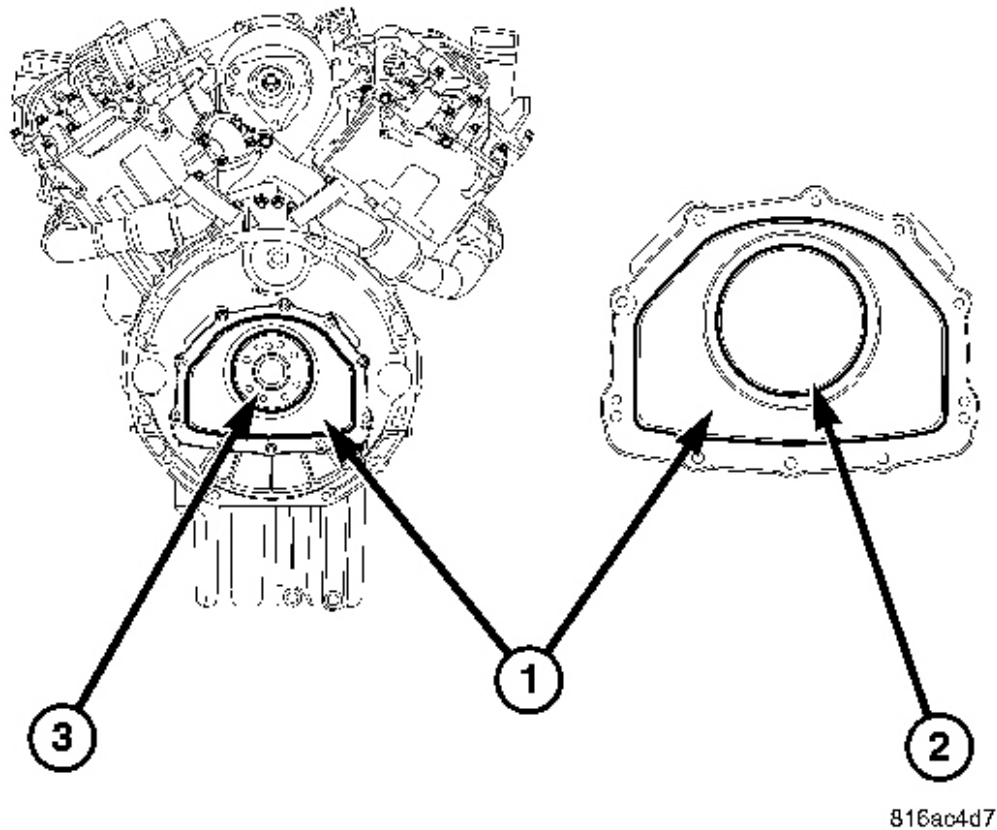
Rear Main Seal, Rear Main Seal Carrier & Crankshaft
